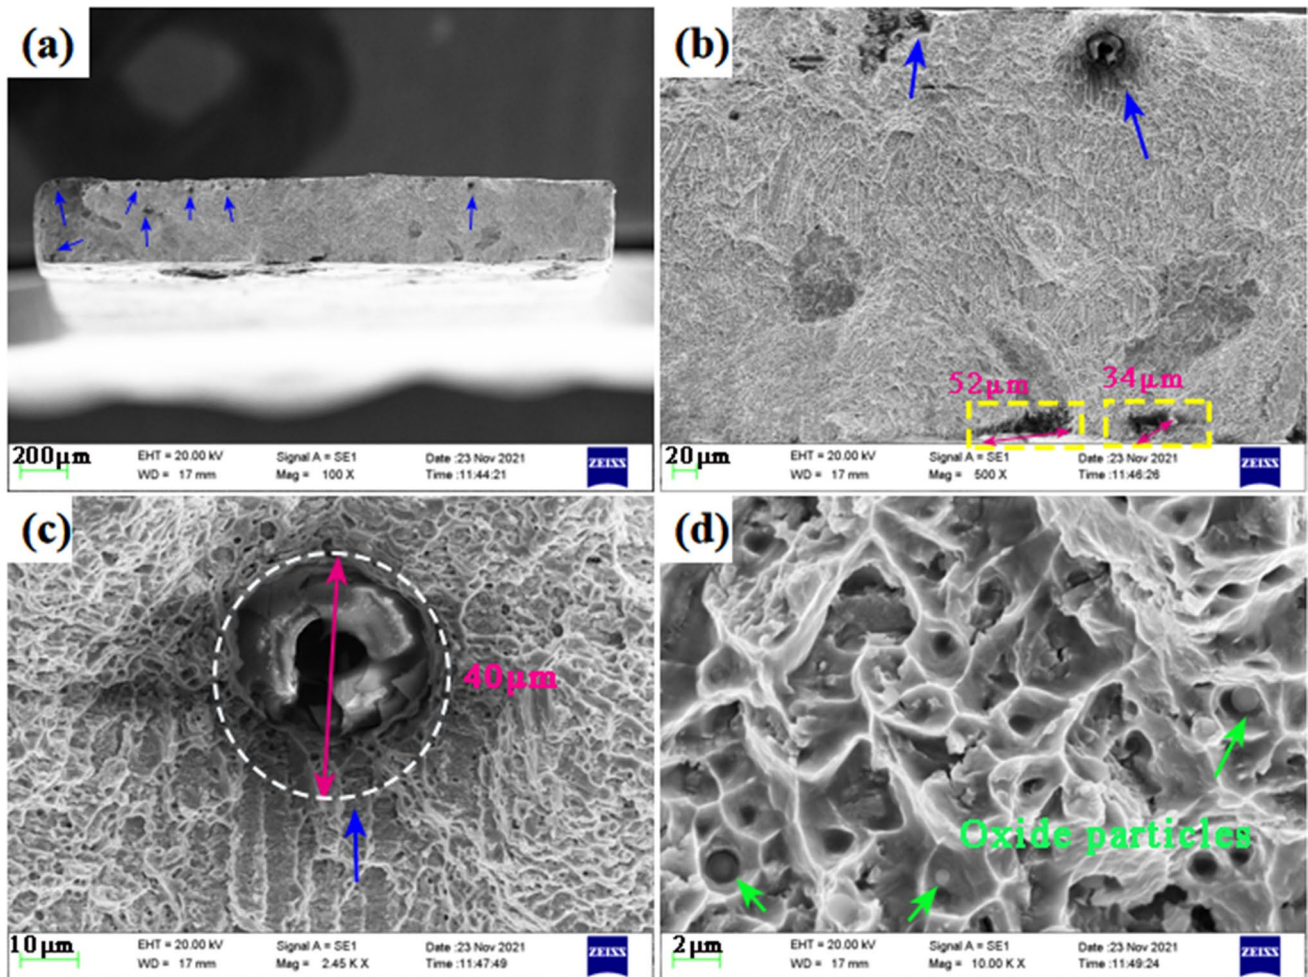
Represented fracture surface of sample ‘w4.5-4’ ( $\epsilon_f = 12.2\%$ ). a Macroscopic fracture morphology, b, c enlarged images showing the dimple fracture and oxide particles
